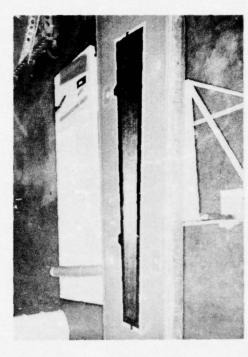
LOWER SKIN AND PICTURE FRAME DOUBLERS
